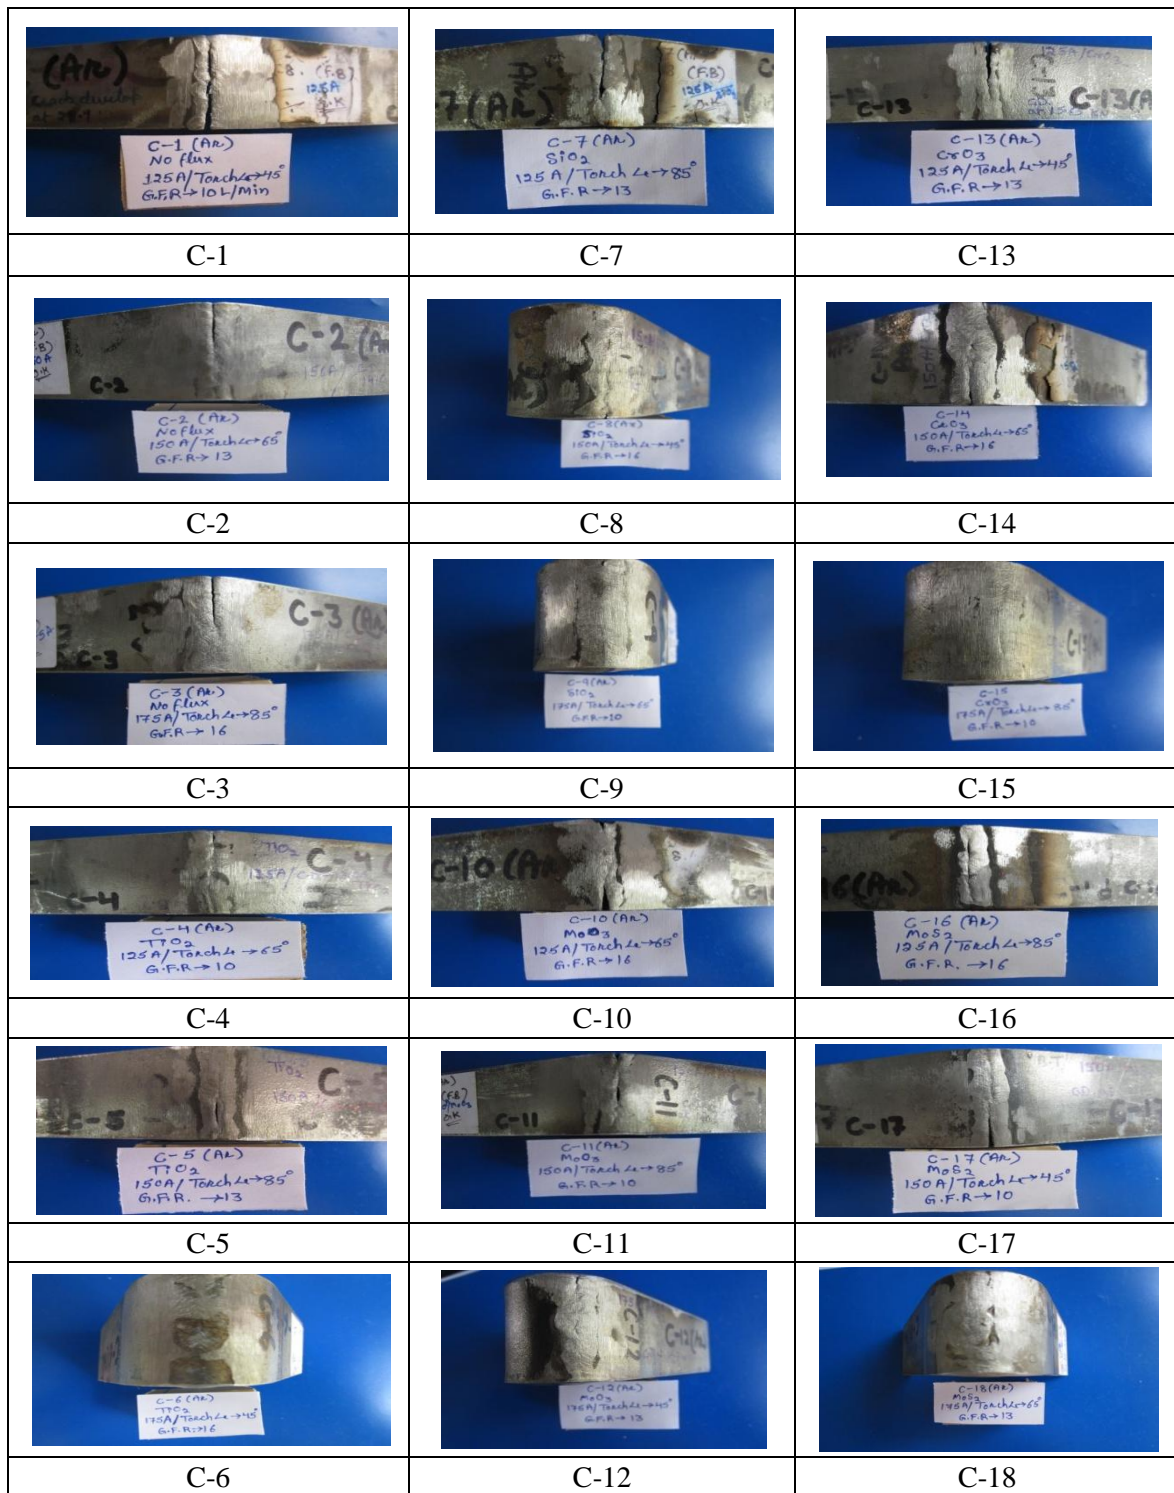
Top view of bend test specimen of A-TIG welding of AISI 304 under Ar shielding
